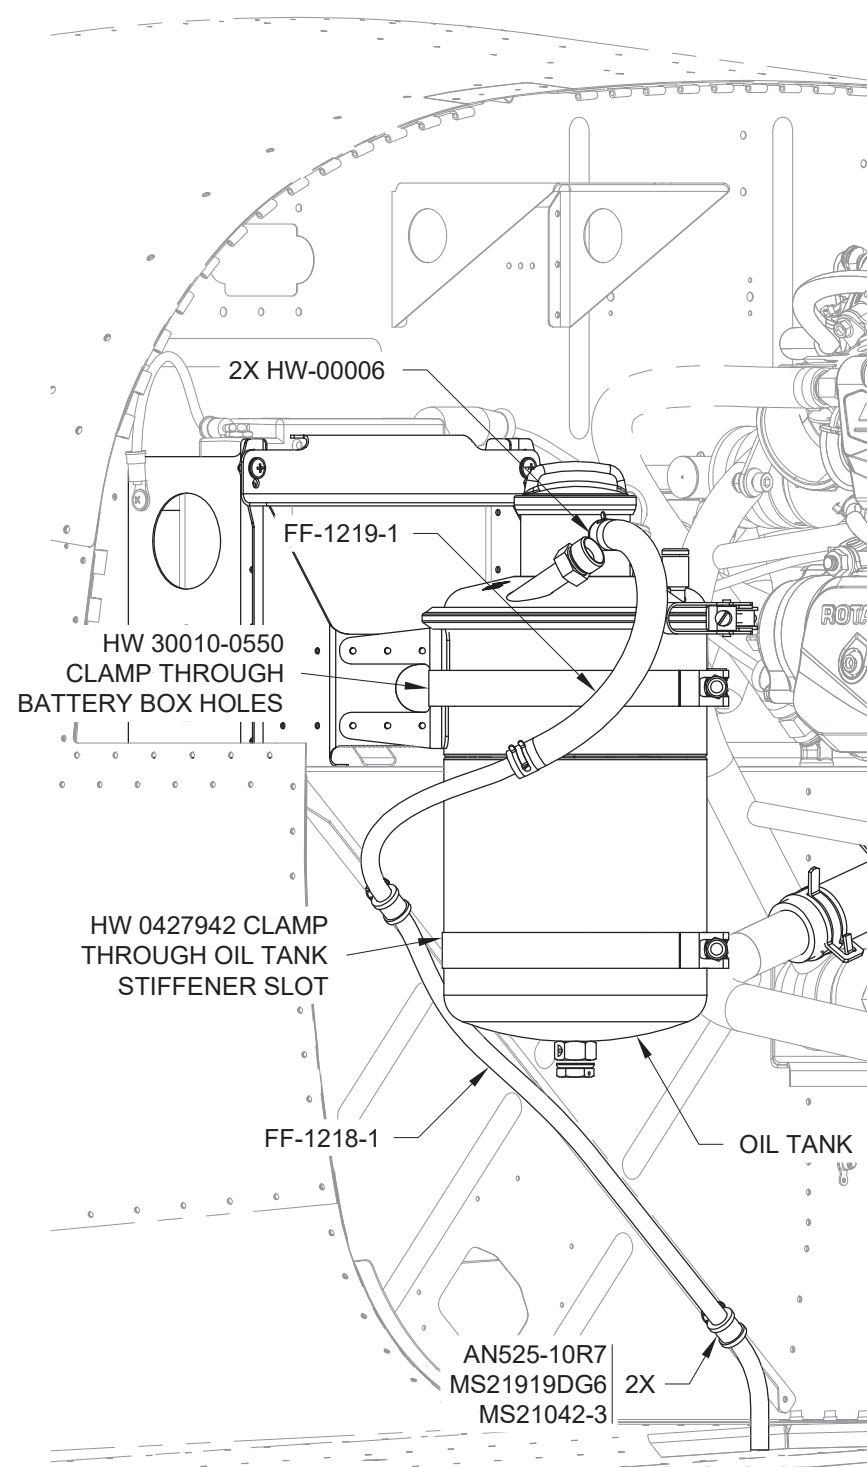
INSTALL OIL TANK & VENT TUBE
